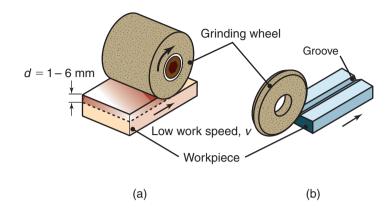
(a) Schematic illustration of the creep-feed grinding process; note the large wheel depth of cut, *d*. (b) A shaped groove produced on a flat surface by creep-feed grinding in one pass. Groove depth is typically on the order of a few mm. This operation also can be performed by some of the processes described in Chapter 27.
